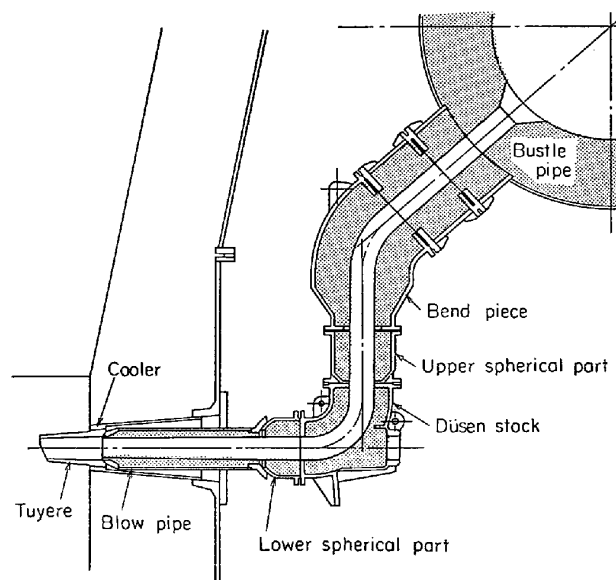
Assembly of blowing stock for Kakogawa No 1 BF.
